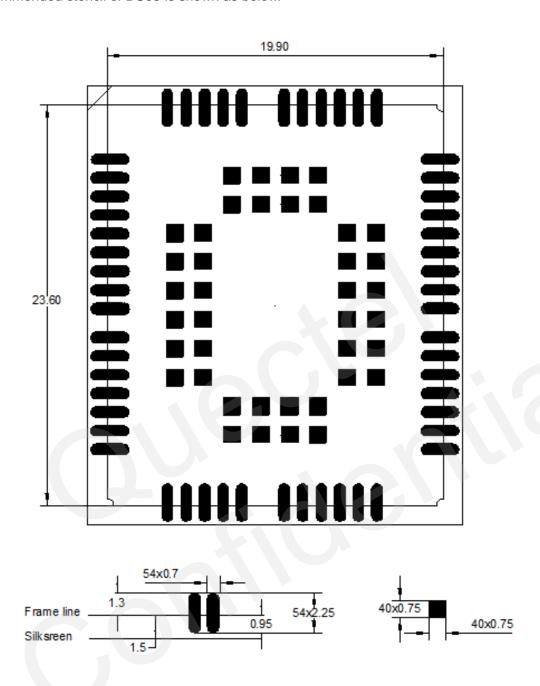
Recommended Stencil of BC95 (Unit: mm)
